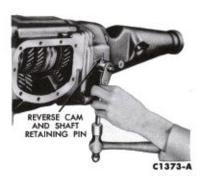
Removing Reverse Cam and Shaft Retaining Pin
